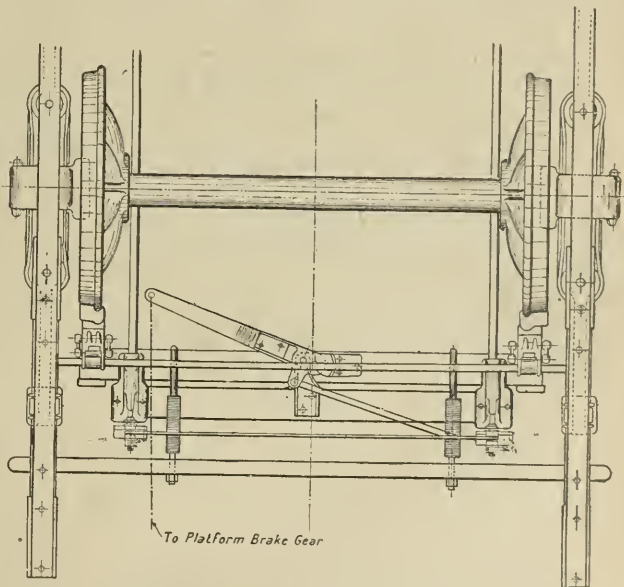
PLAN VIEW OF ANGER BRAKE ADJUSTER.
